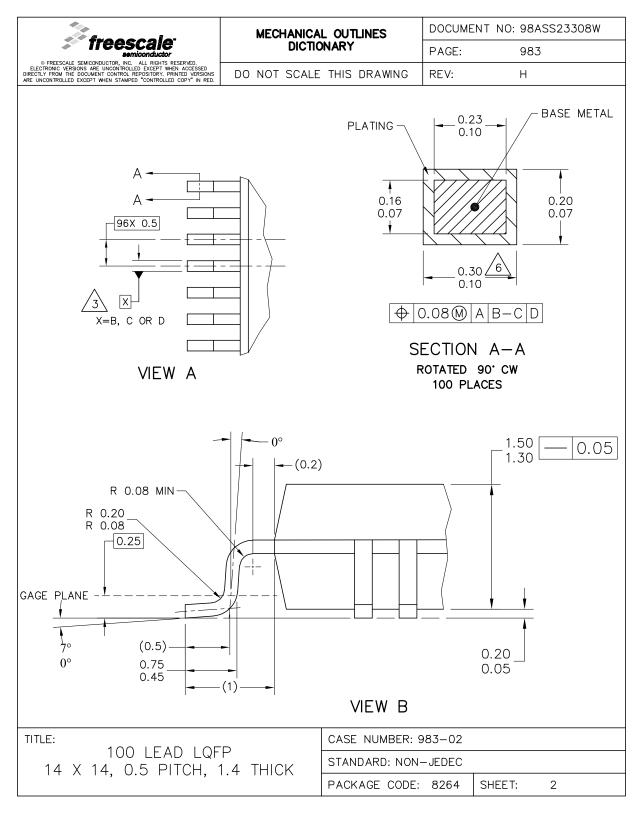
100 LQFP package mechanical drawing (Part 2 of 3)
